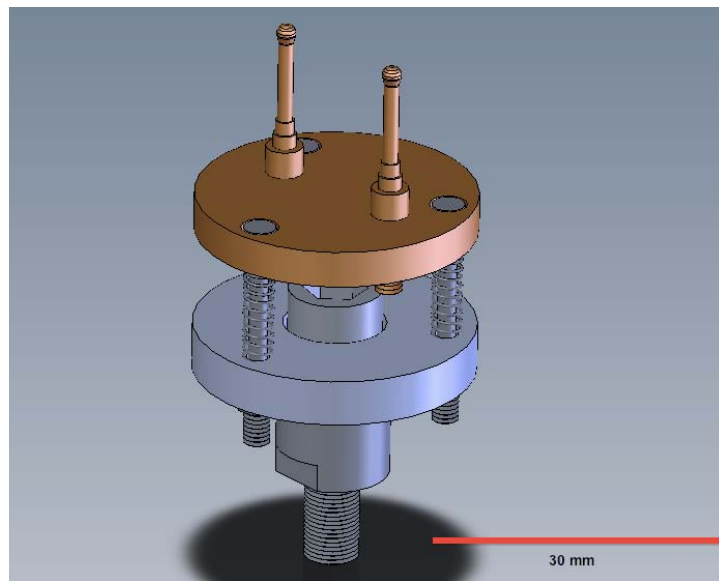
A 3-D rendering of the transfer fork. The transfer fork uses two lantern-style pins, which insert into the holes of the sample holder and tip holder to pick them up. These pins have some spring like wings which create friction stopping the tip tool or sample mount from slipping off. The transfer fork has three sprung connections in order to give it some flexibility, this allows for some small mis-alignment in the system.
